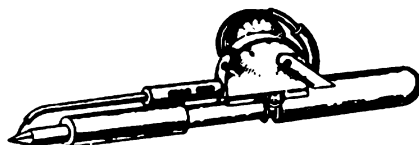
Electrical soldering tool with automatic feeding of the wire-shaped solder
